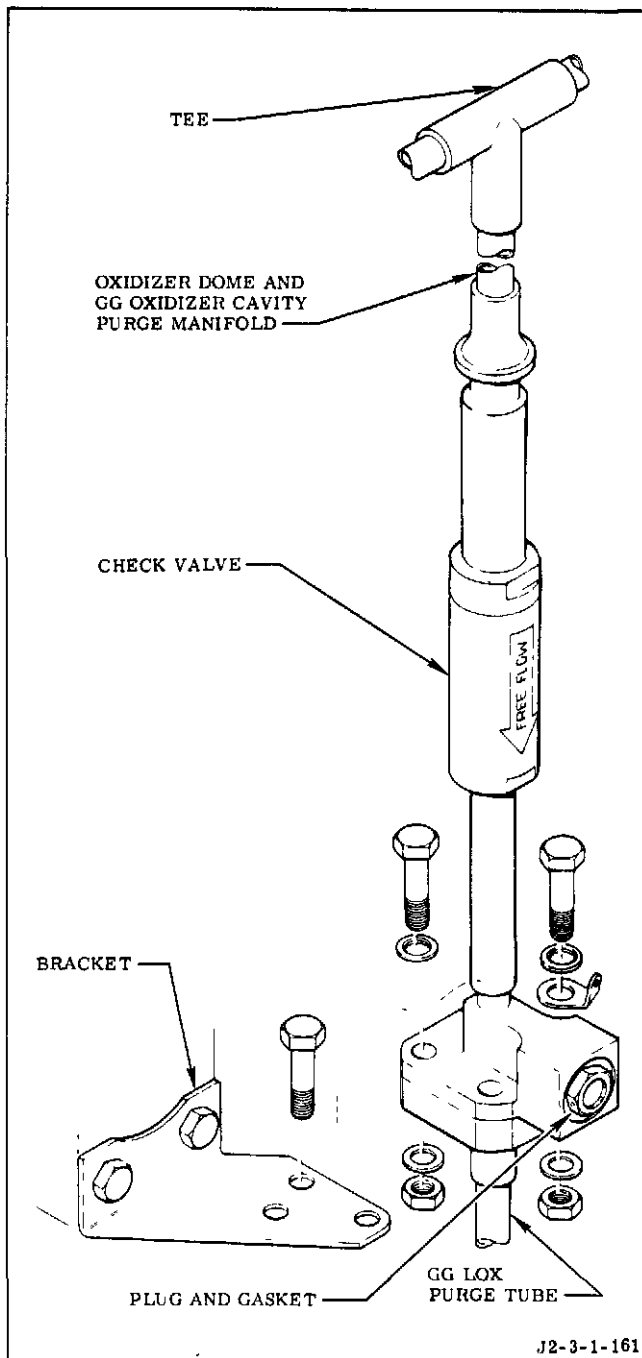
A: Gas Generator Oxidizer Purge Check Valve
